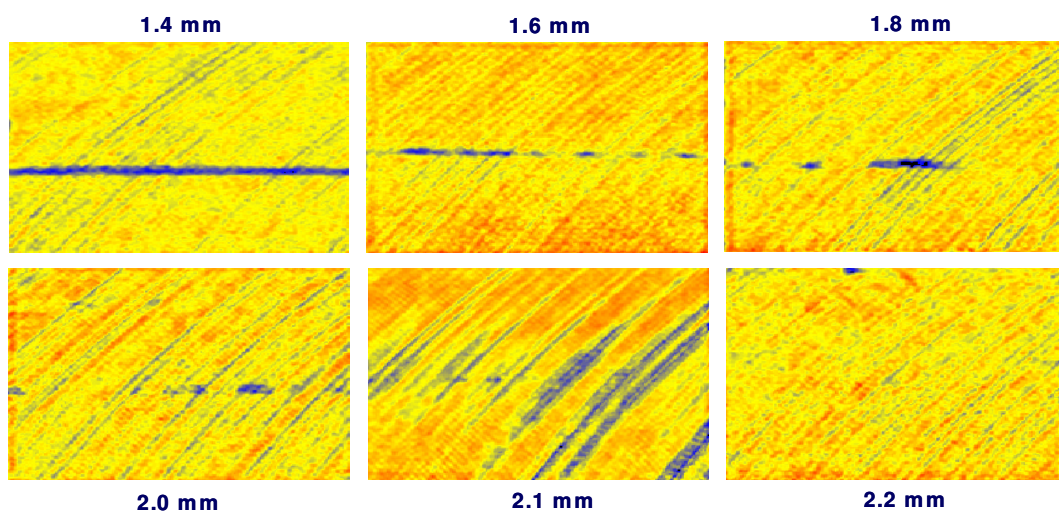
F-SAFT images of the bottom surface for different pin penetrations along the weld as indicated.
